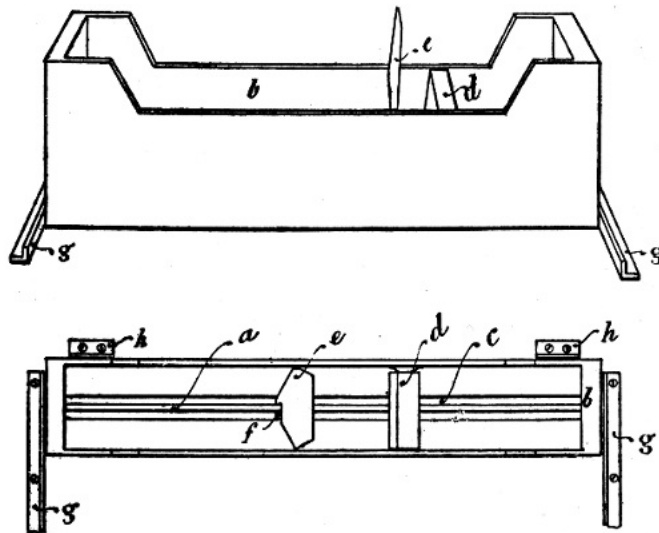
Elevation and Plan of Card-charging Tray (Section 383).
